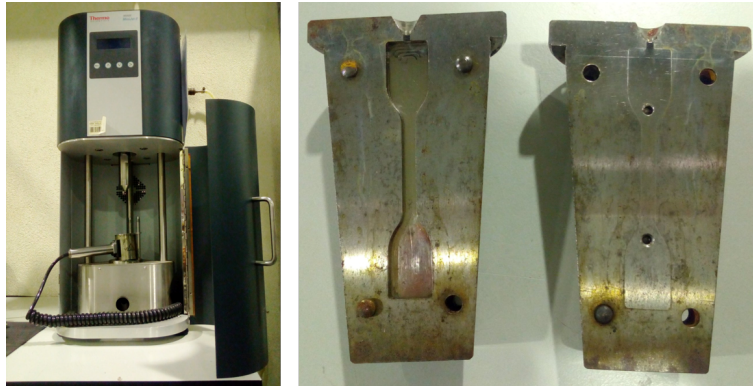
Injection moulding machine, HAAKE Minijet II, ThermoFisher Scientific, and mould.
